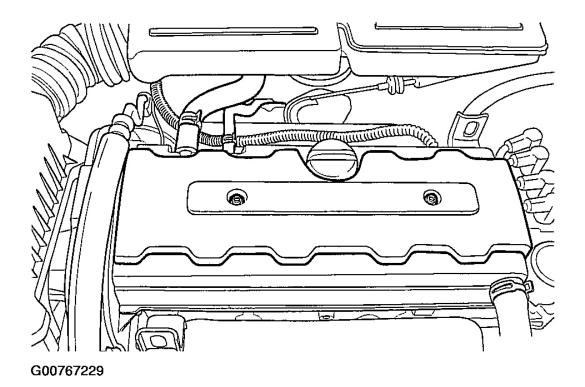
Connecting The Breather Tube To The Camshaft Cover Courtesy of SUZUKI OF AMERICA CORP.
